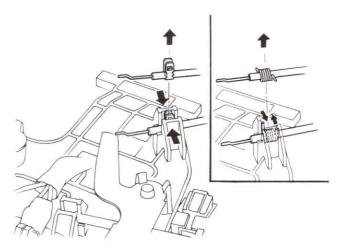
Control cable clips at control lever end (Sec 32)
